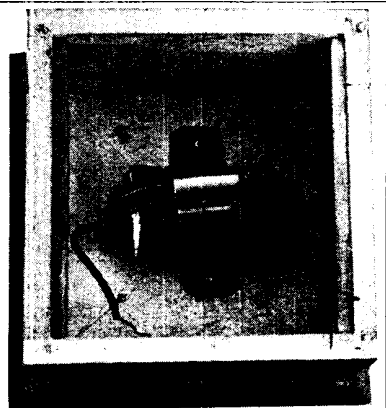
How the choke coil is fitted in position at the bottom of the cabinet
